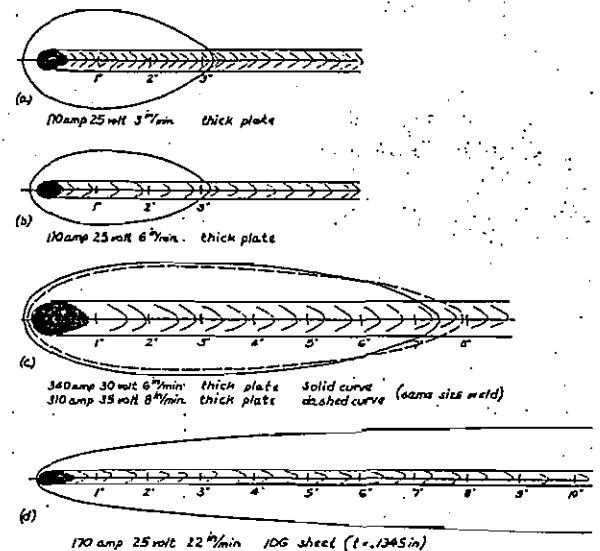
Variance of welding technique. In each case, surface isotherm of 300°F is shown surrounding welding source.
